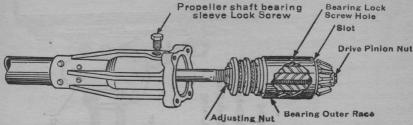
Removing propeller shaft, Models Four-Ninety, FA
